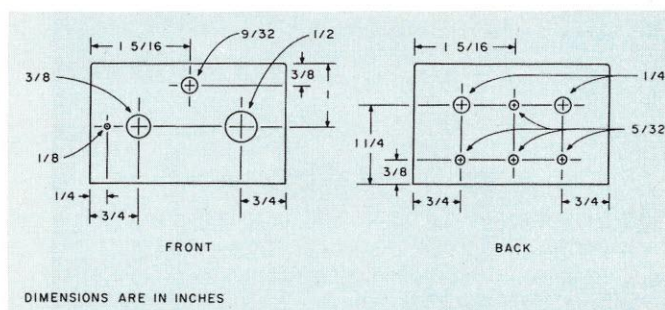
Front and back of the cabinet showing the centers and the size of the holes to drill for mounting the components.
